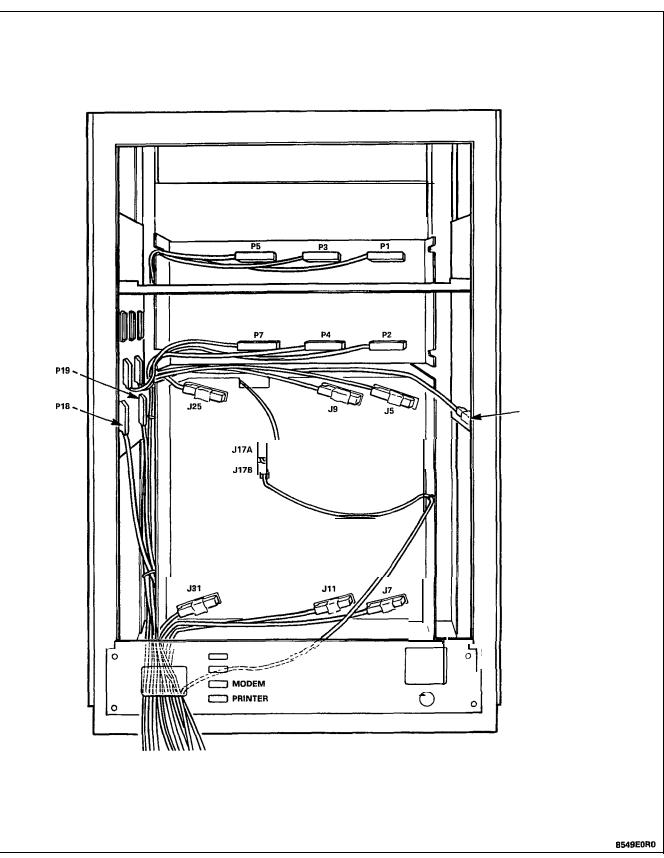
Rear View of SX-200 Universal Control Cabinet - Signal Cables
